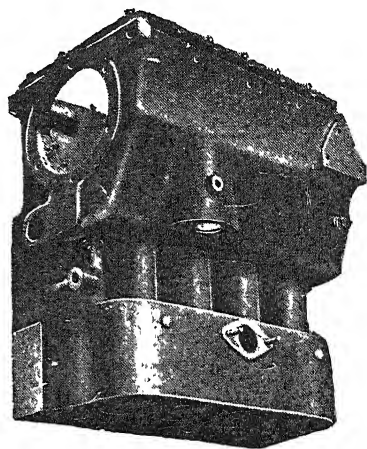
The identical cylinders and crankcase combined, perfectly repaired by Scientific Welding, at small cost, within a few days, and under a Money-back Guarantee.
